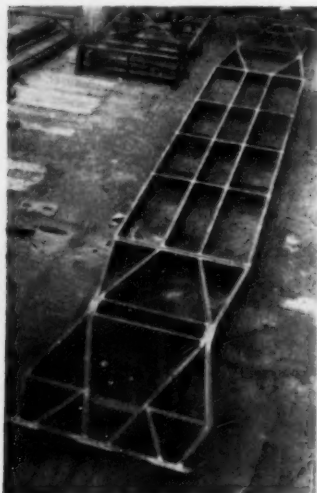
Typical railcar underframe, produced from pressed or rolled section up to 60 ft. in length, of riveted or welded construction
